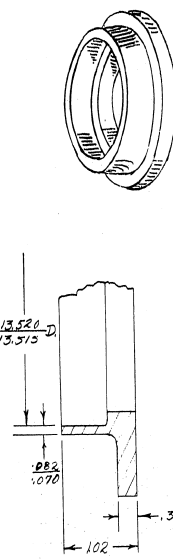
P/N 226964 - Flange Brace, Rear Main Bearing Support Cone Assembly, Material Ti-A-70
